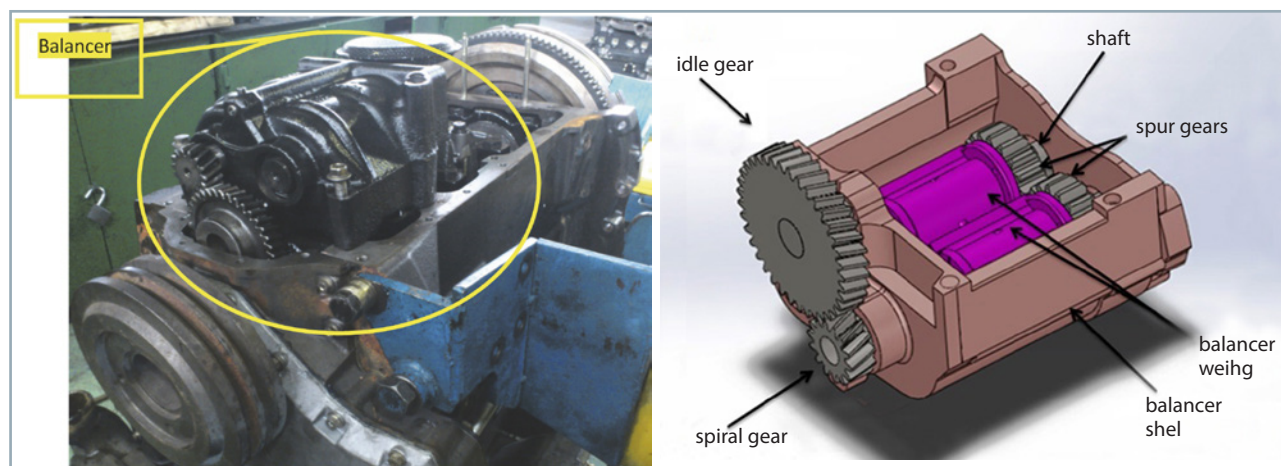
Balancer unit location in MF-285 tractor engine (left); View of balancer with its composing parts (right)
